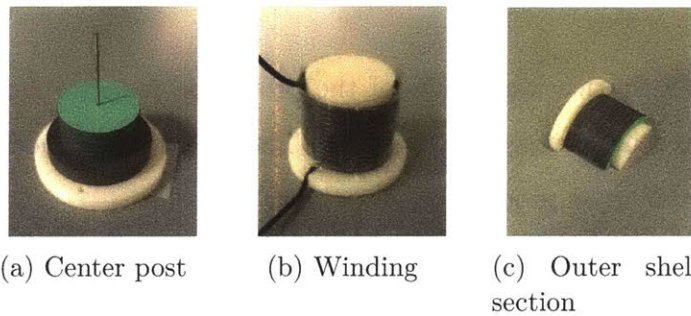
Construction of the prototype inductor using custom 3D-printed fixtures (white).
